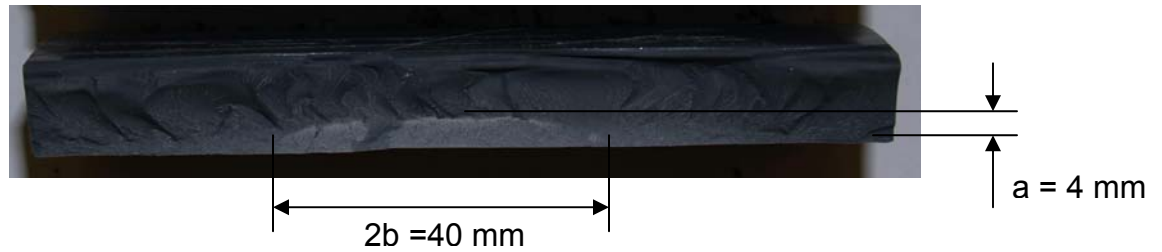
Fracture surface of OLD specimen at 30 MPa and 45°C
